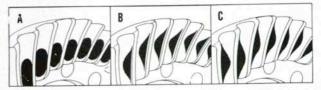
Views of bevel ring gear tooth contact patterns A. Proper tooth contact—drive side pattern
